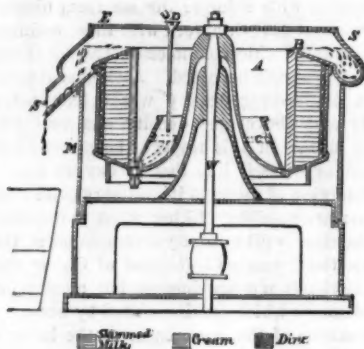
CENTRIFUGAL MILK-SKIMMING MACHINE.
